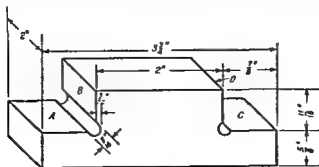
To be shaped on Faces A, B, C and D (see 1
